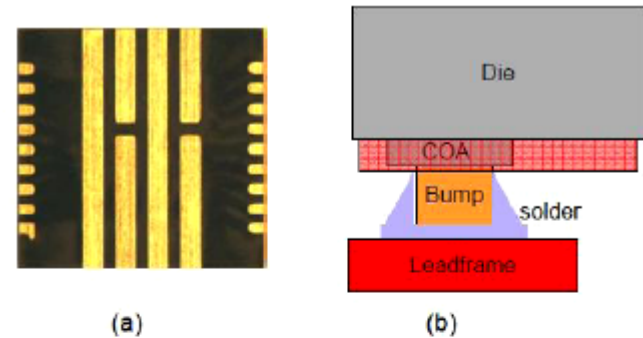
(a) bottom view of QFN-style package showing board connections, (b) cross-section through plated bump.
